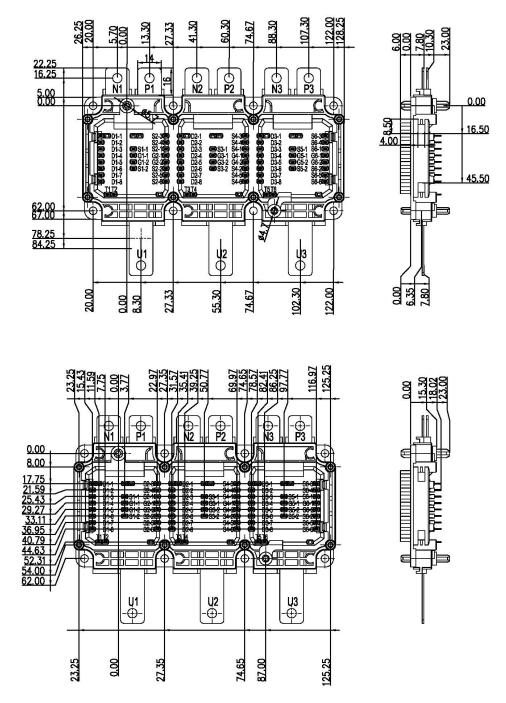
650V 300A GaN 3 phase Power Module Package Outline
